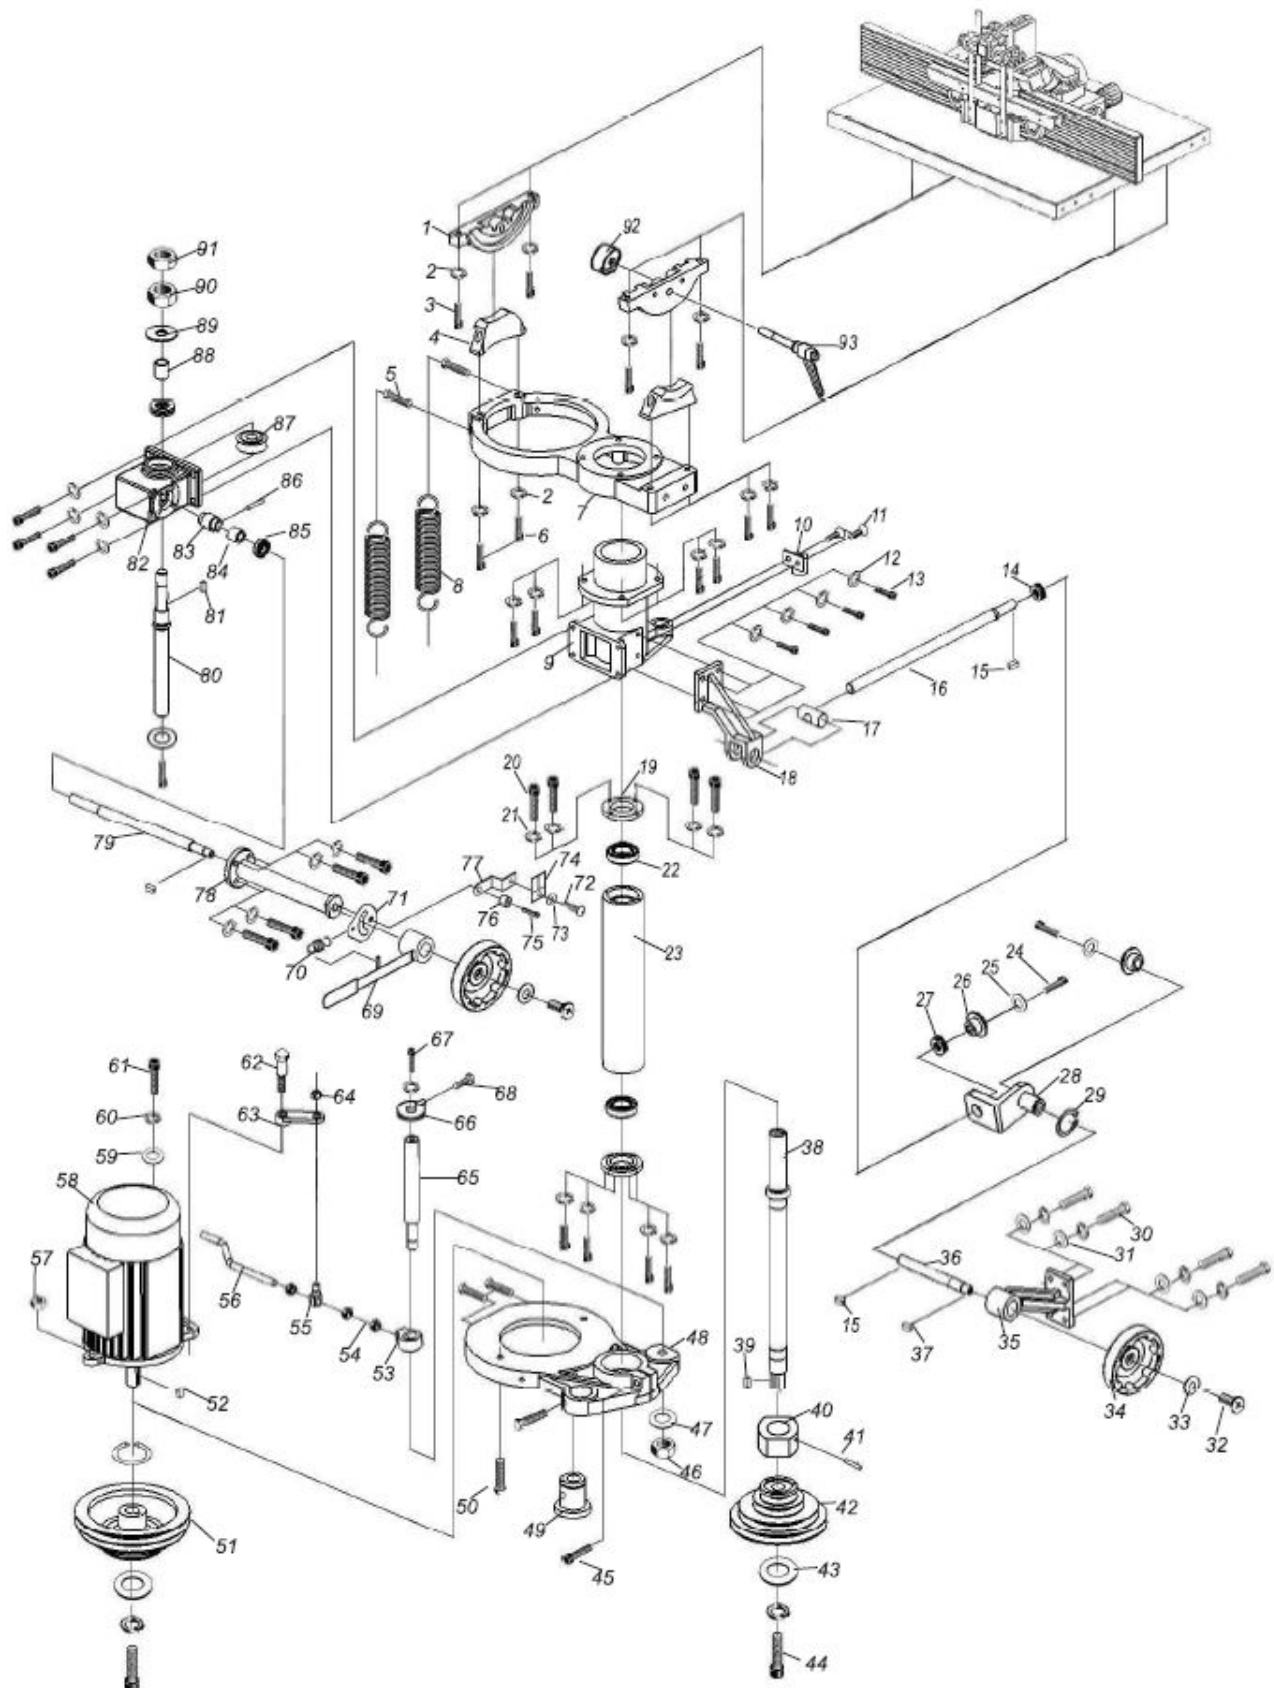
Spare parts drawing 3 - Table router TF 190 SE
